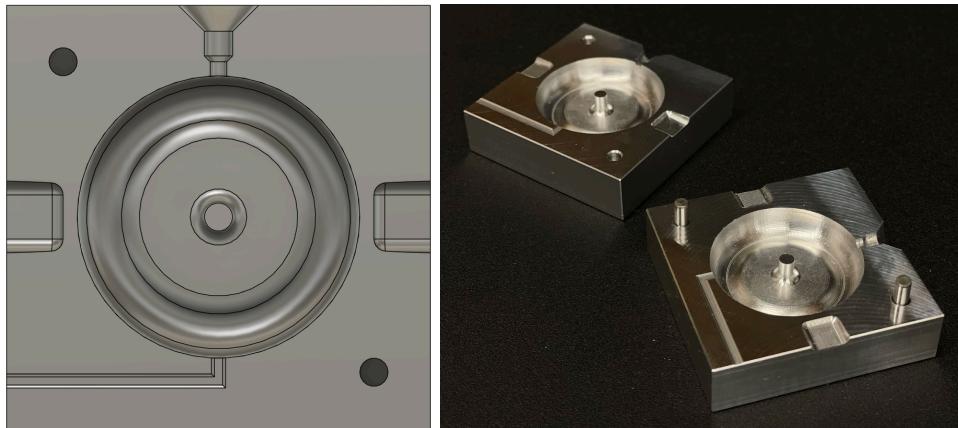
Sample wheel mold. Left: CAD. Right: machined mold.
